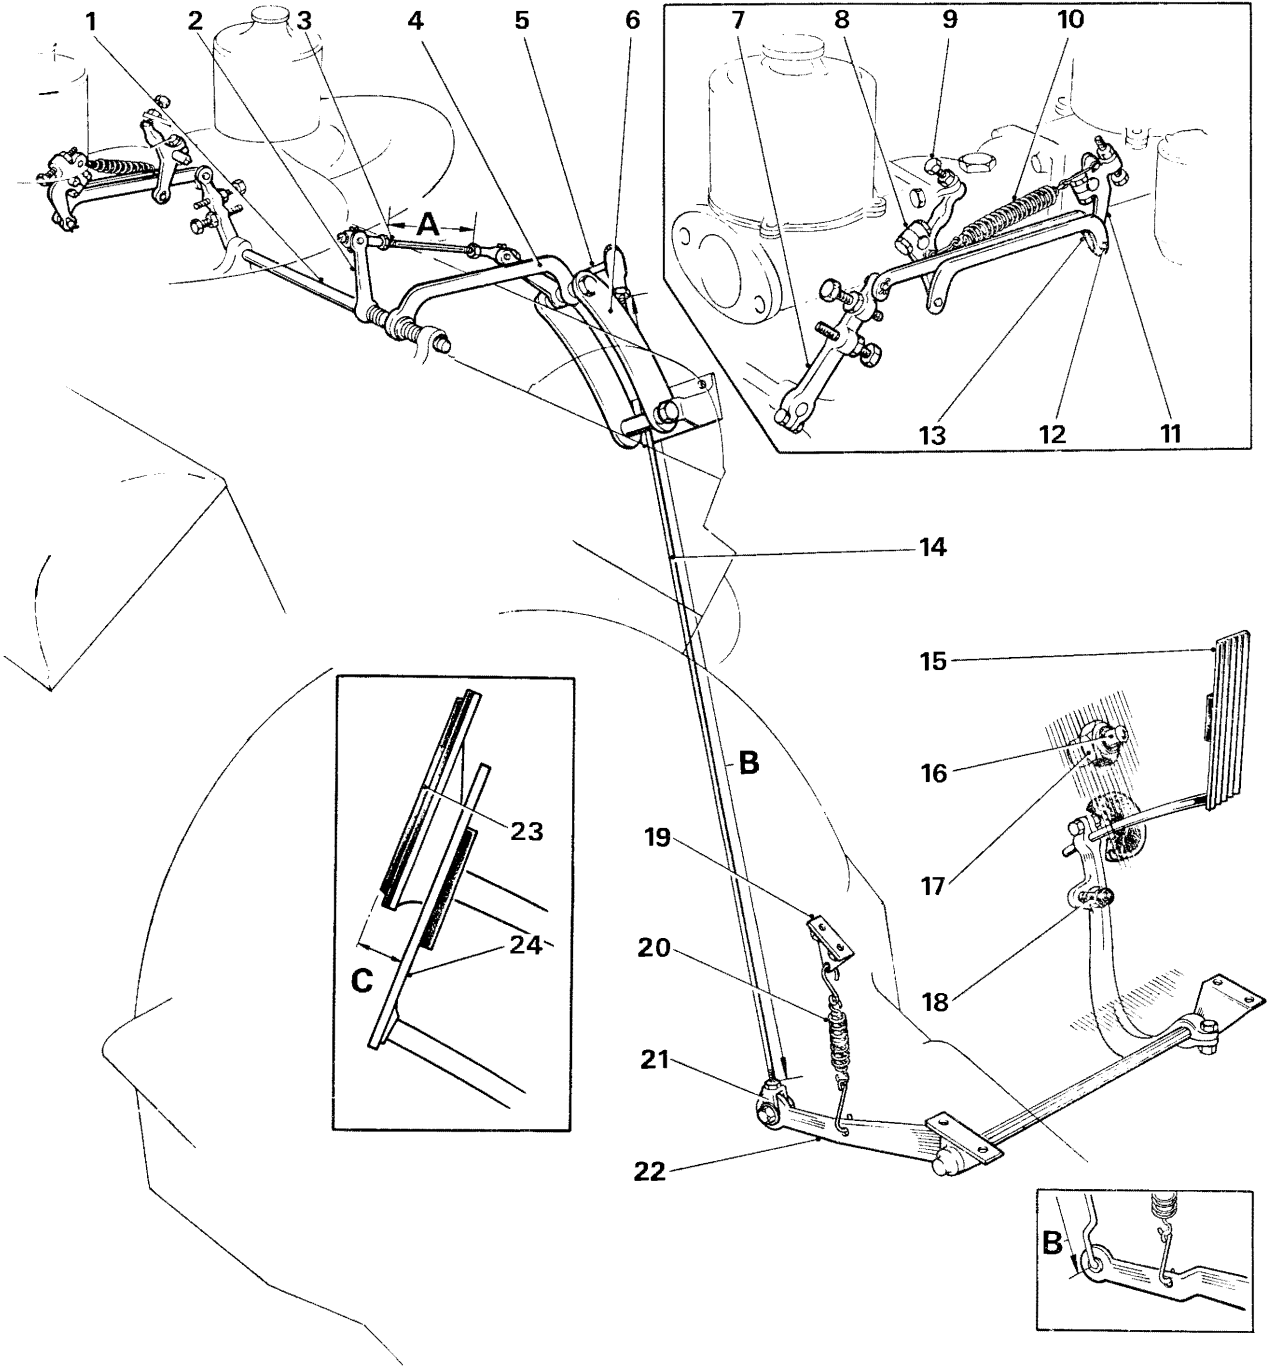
THROTTLE CONTROL LINKAGE—EARLY L.H. DRIVE CARS
